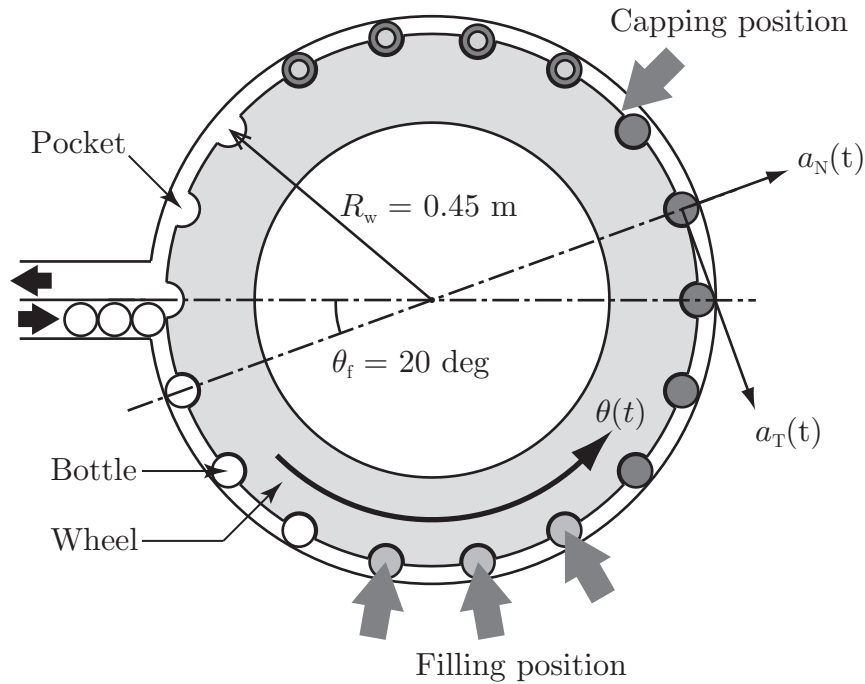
Schematic drawing of the intermittent conveyance bottling machine
